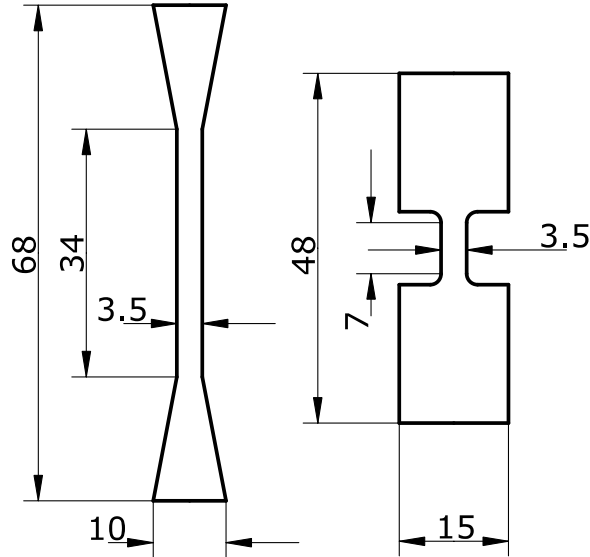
Dimensions in millimetres for tension (left) and compression (right) specimens.
